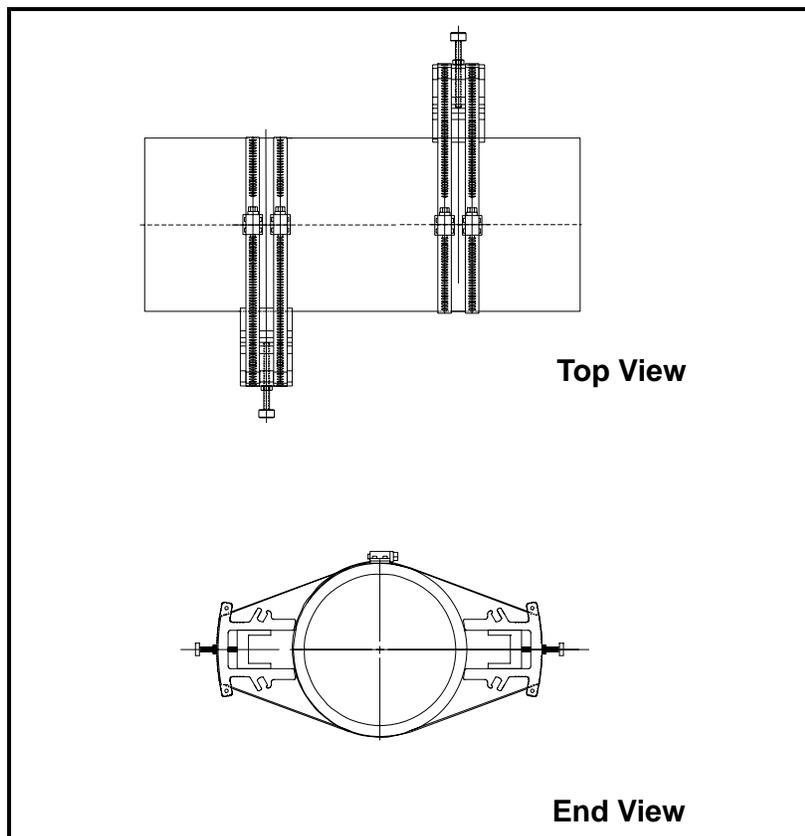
A Single-Traverse CF-ES Installation without Transducers
